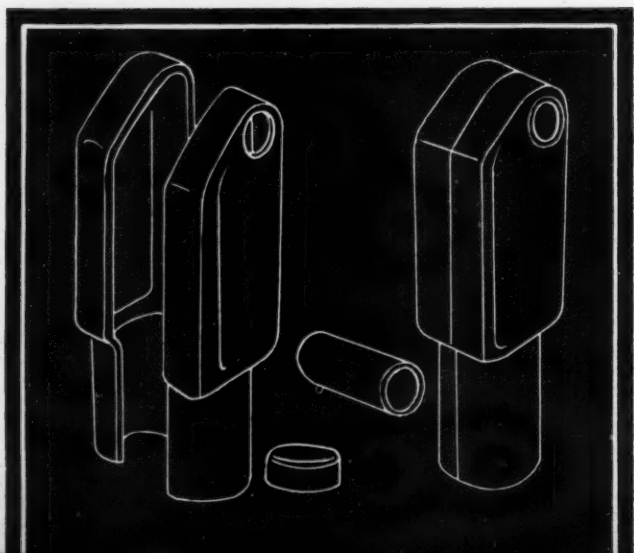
Upper piece in each view shows casting of a draw-spindle handle for a bench lathe. Lower piece is the part redesigned as a stamping
